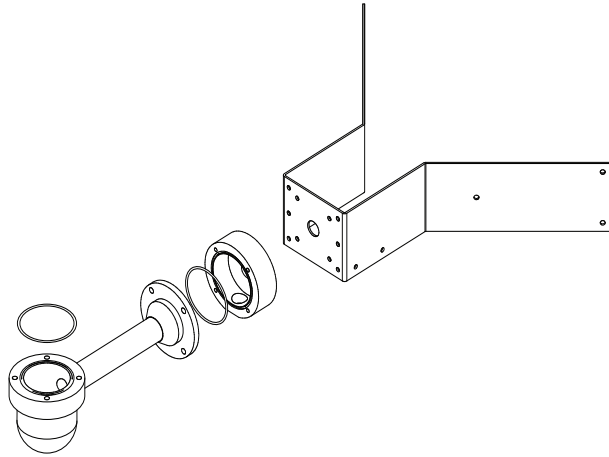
Typical corner mount (from left to right: Wall Mount Bracket (MIC-WMB), Shallow Conduit Adapter (MIC-SCA), and Corner Mount Bracket (MIC-CMB))
